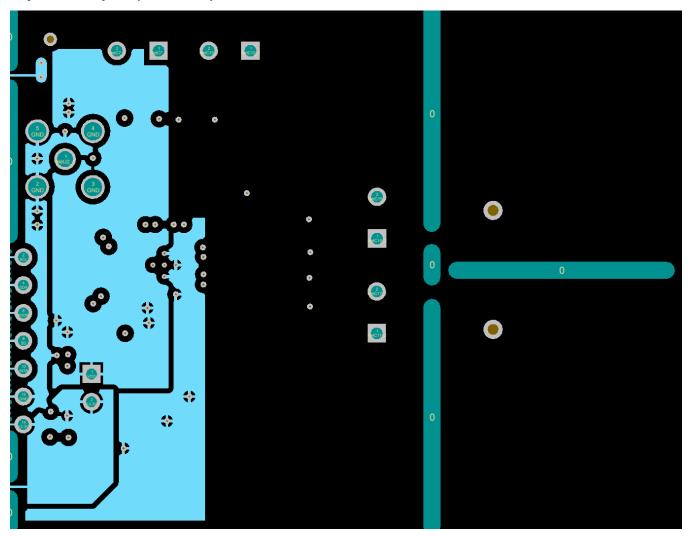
Example PCB Layout: Mid-layer 2 (Power)
